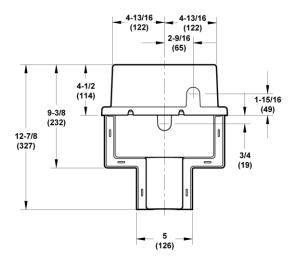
Dimensions of 599-10071 Weather Shield in Inches (Millimeters).
